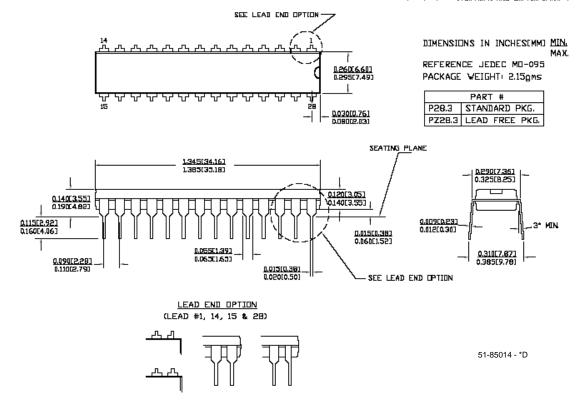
28-Lead (300-Mil) Molded DIP
